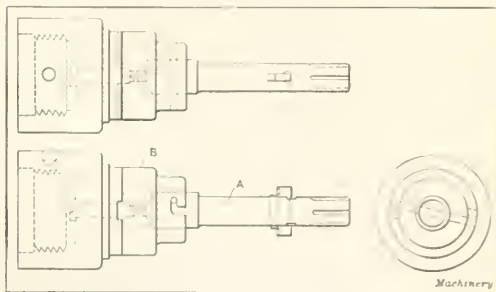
Back-facing Bar with Holder similar in Purpose to the one shown in Fig. 2
